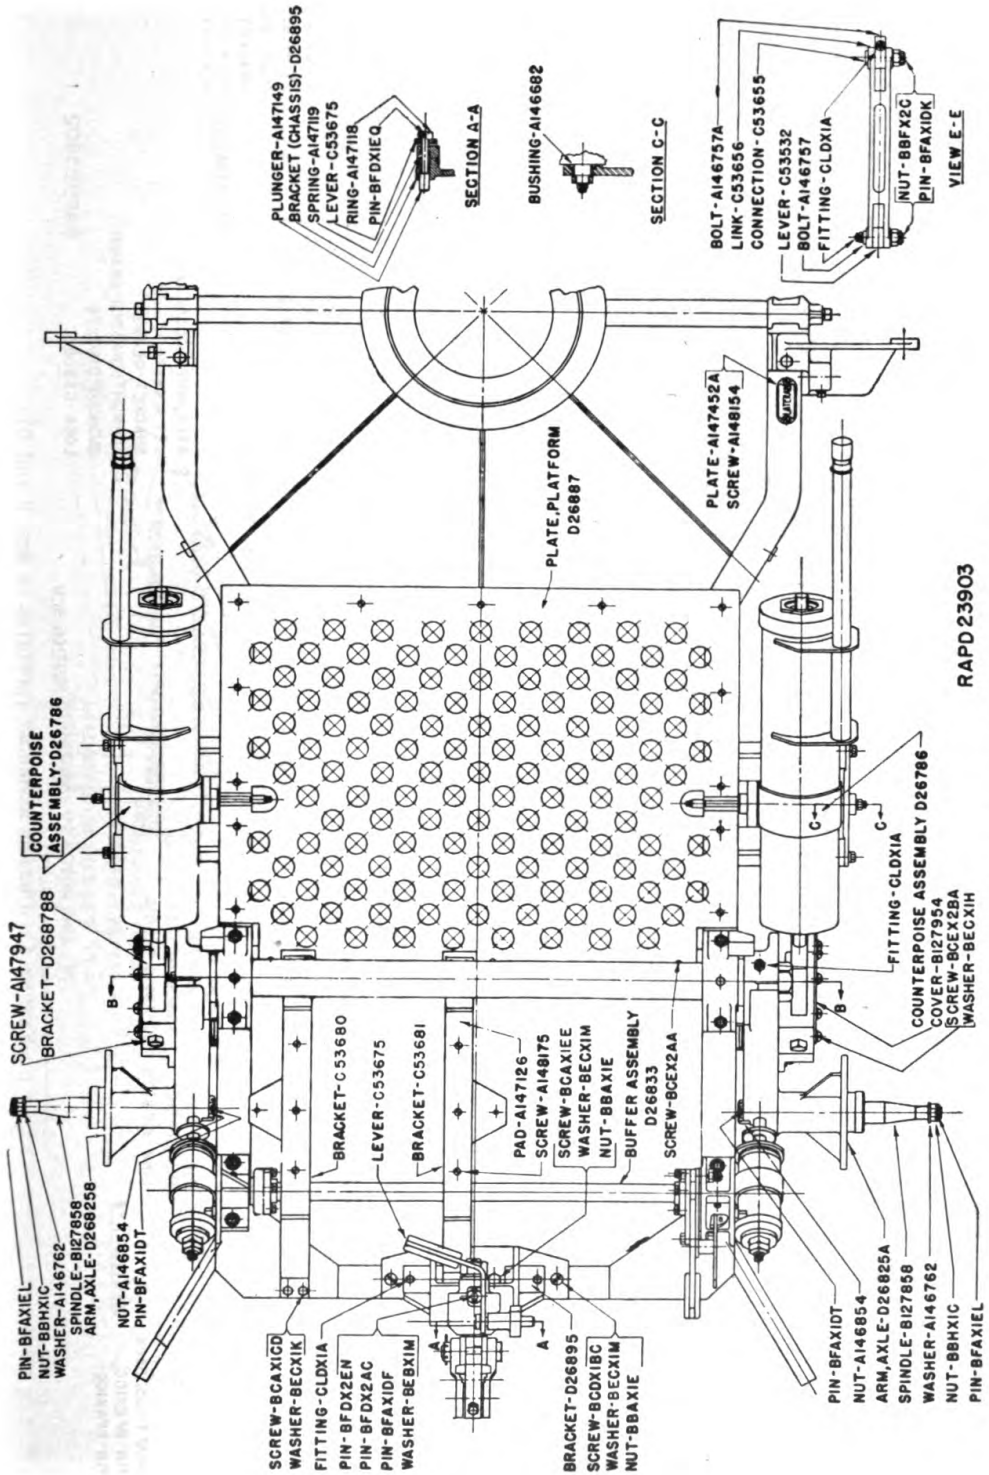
Chassis assembly (pertains to fig. 2).
